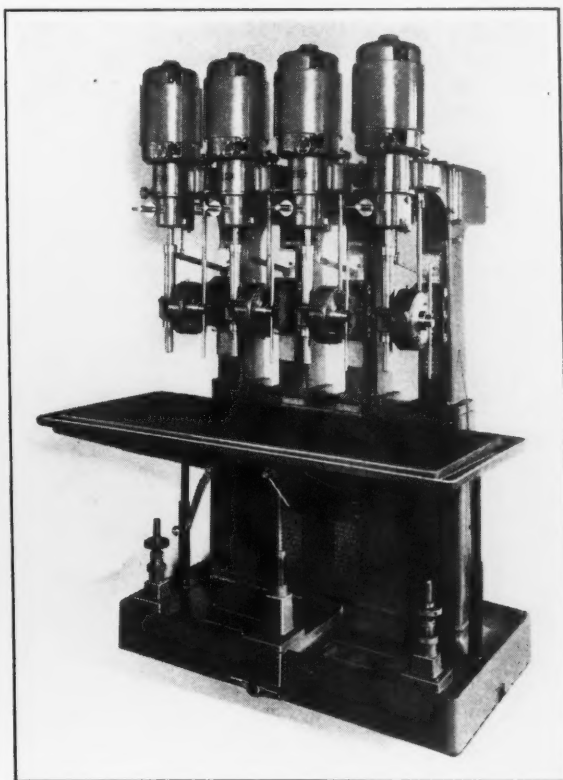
Allen Drilling Machine with Direct Motor Drive for Each Spindle
